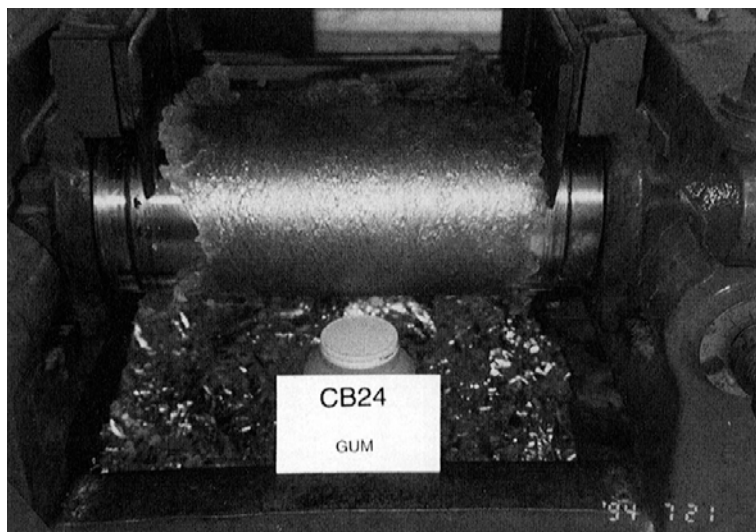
Photograph of CB24 gum rubber on the mill.
